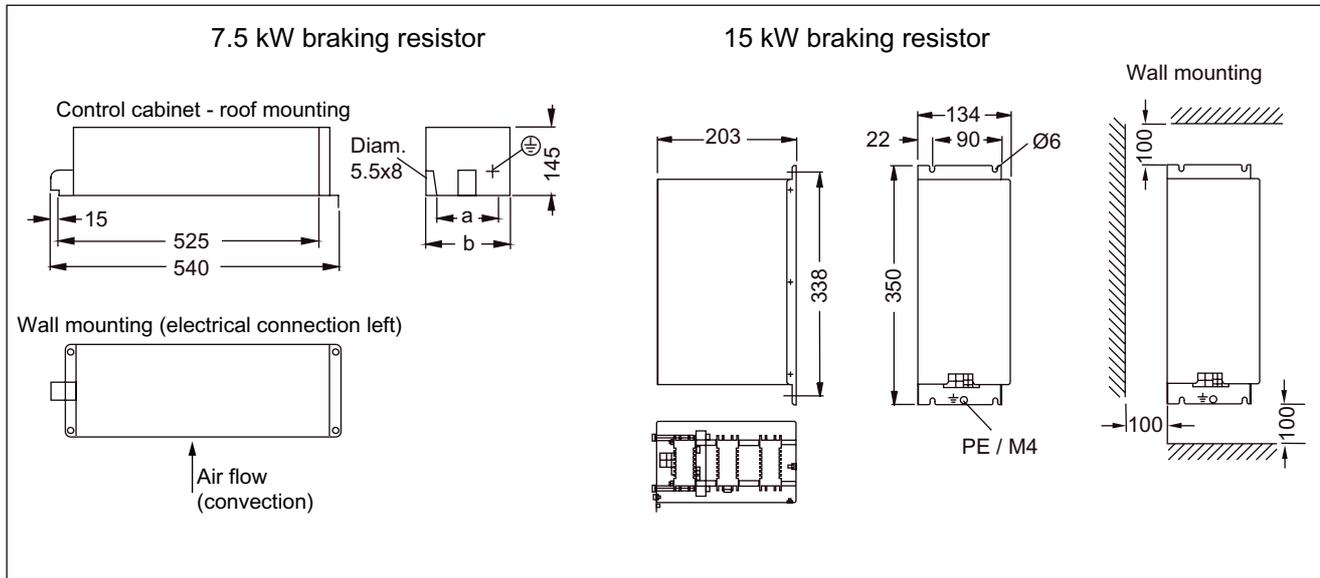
Dimension and installation drawing for braking resistor 7.5 kW and 15 kW, all dimensions in mm
